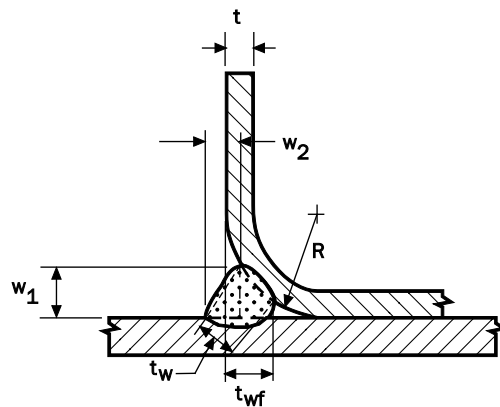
Flare-Bevel Groove Weld
